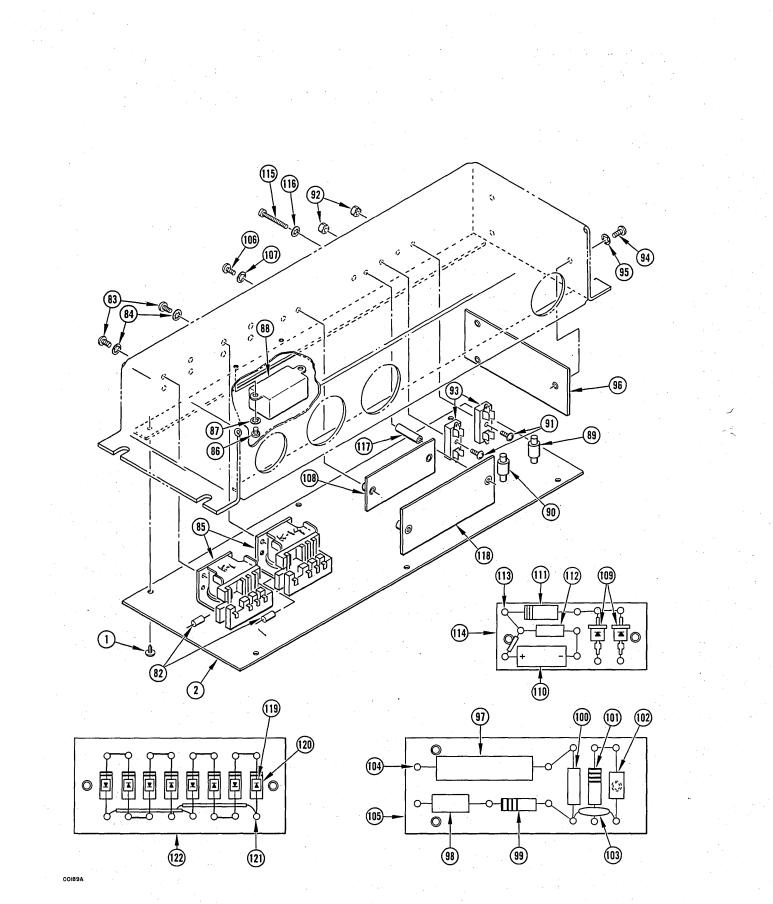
Transport Electronics Chassis (Sheet 2 of 2)
